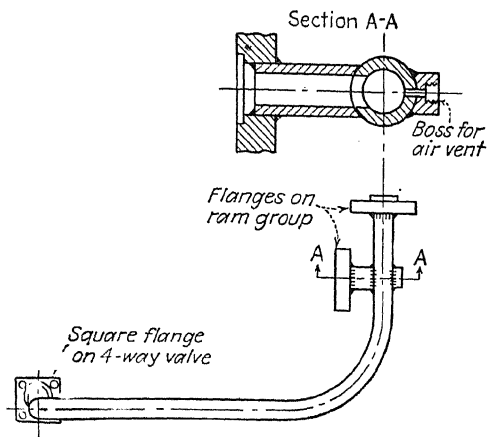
Typical piping detail for 1,500-psi hydraulic-steering-gear system on ship-board.
